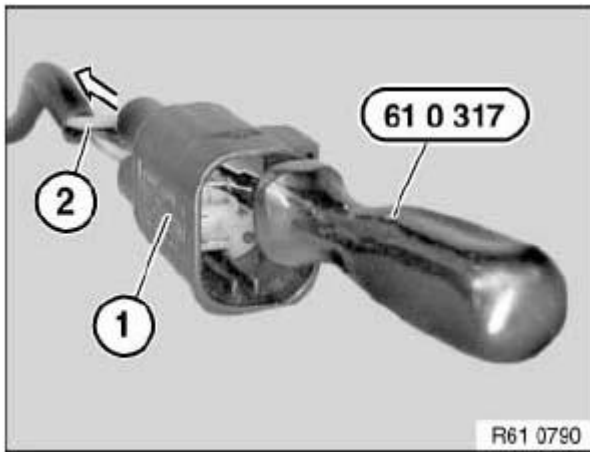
Inserting Special Tool (61 0 317) Into Pin Housing
